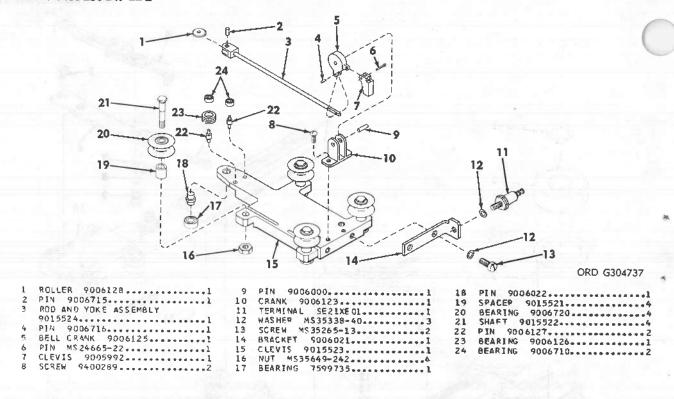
CARRIAGE ASSEMBLY /9015527/-EXPLODED VIEW /SEE FIGURE 45 FOR NEXT HIGHER ASSEMBLY/
